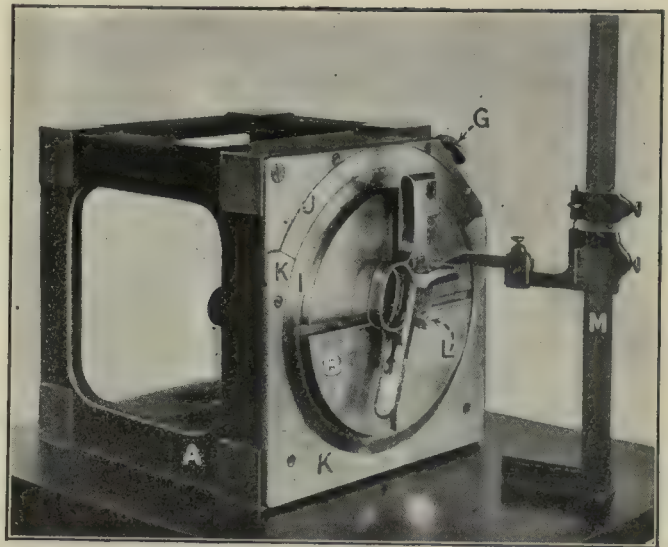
FACE OF ANGLE-MEASURING FIXTURE
